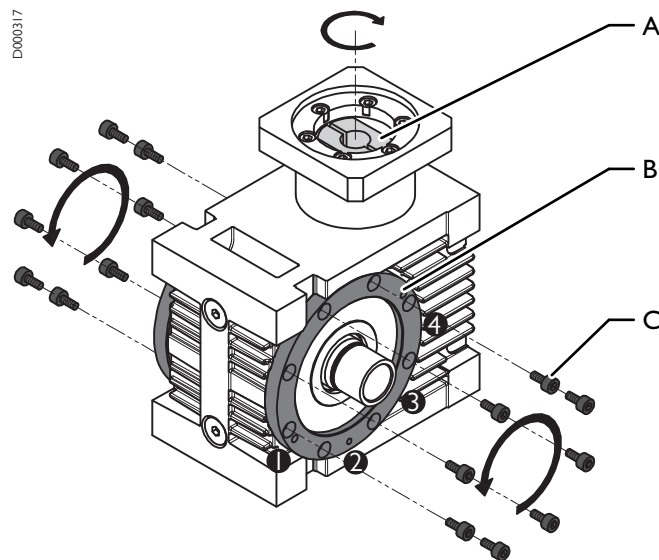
Setting the gear backlash: Güdel gearbox unit
